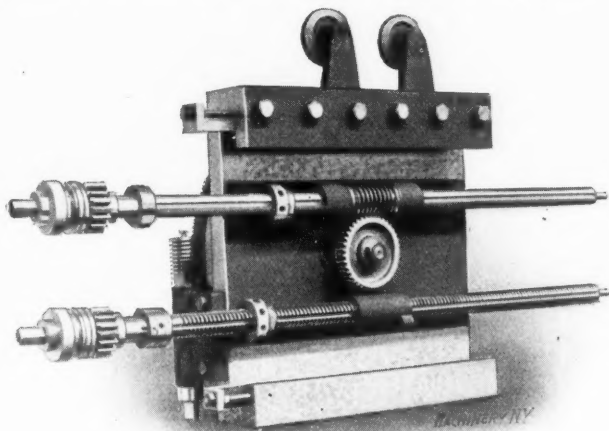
Rear View of Saddle for Swivel Head, showing Large Diameter of Rods and Screws and the Fine Adjusting Collars for the Tool Movements
